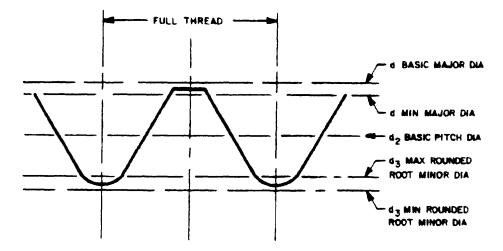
COMPLETELY FORMED EXTERNAL THREAD
